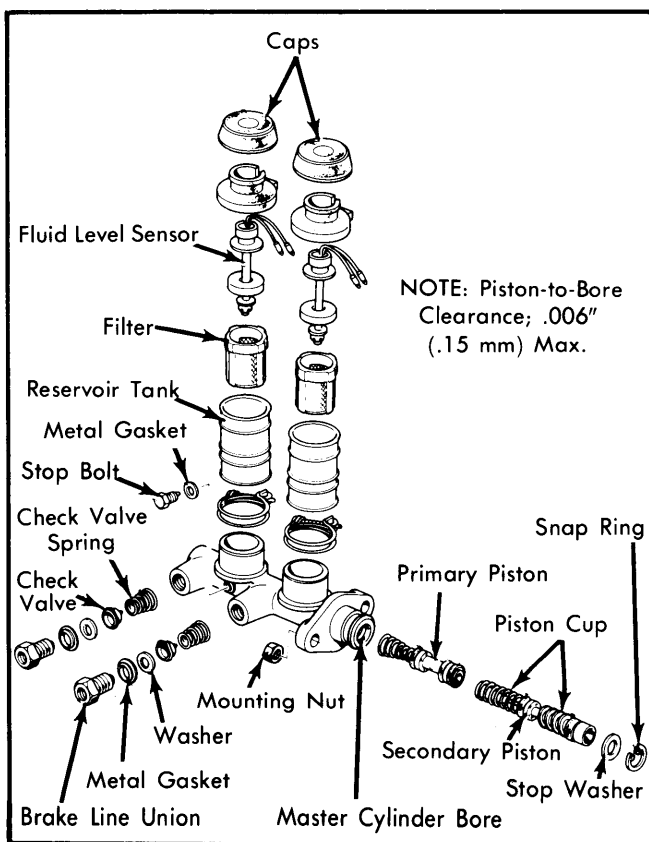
Exploded View of Honda Accord Master Cylinder Assembly — Others Similar
